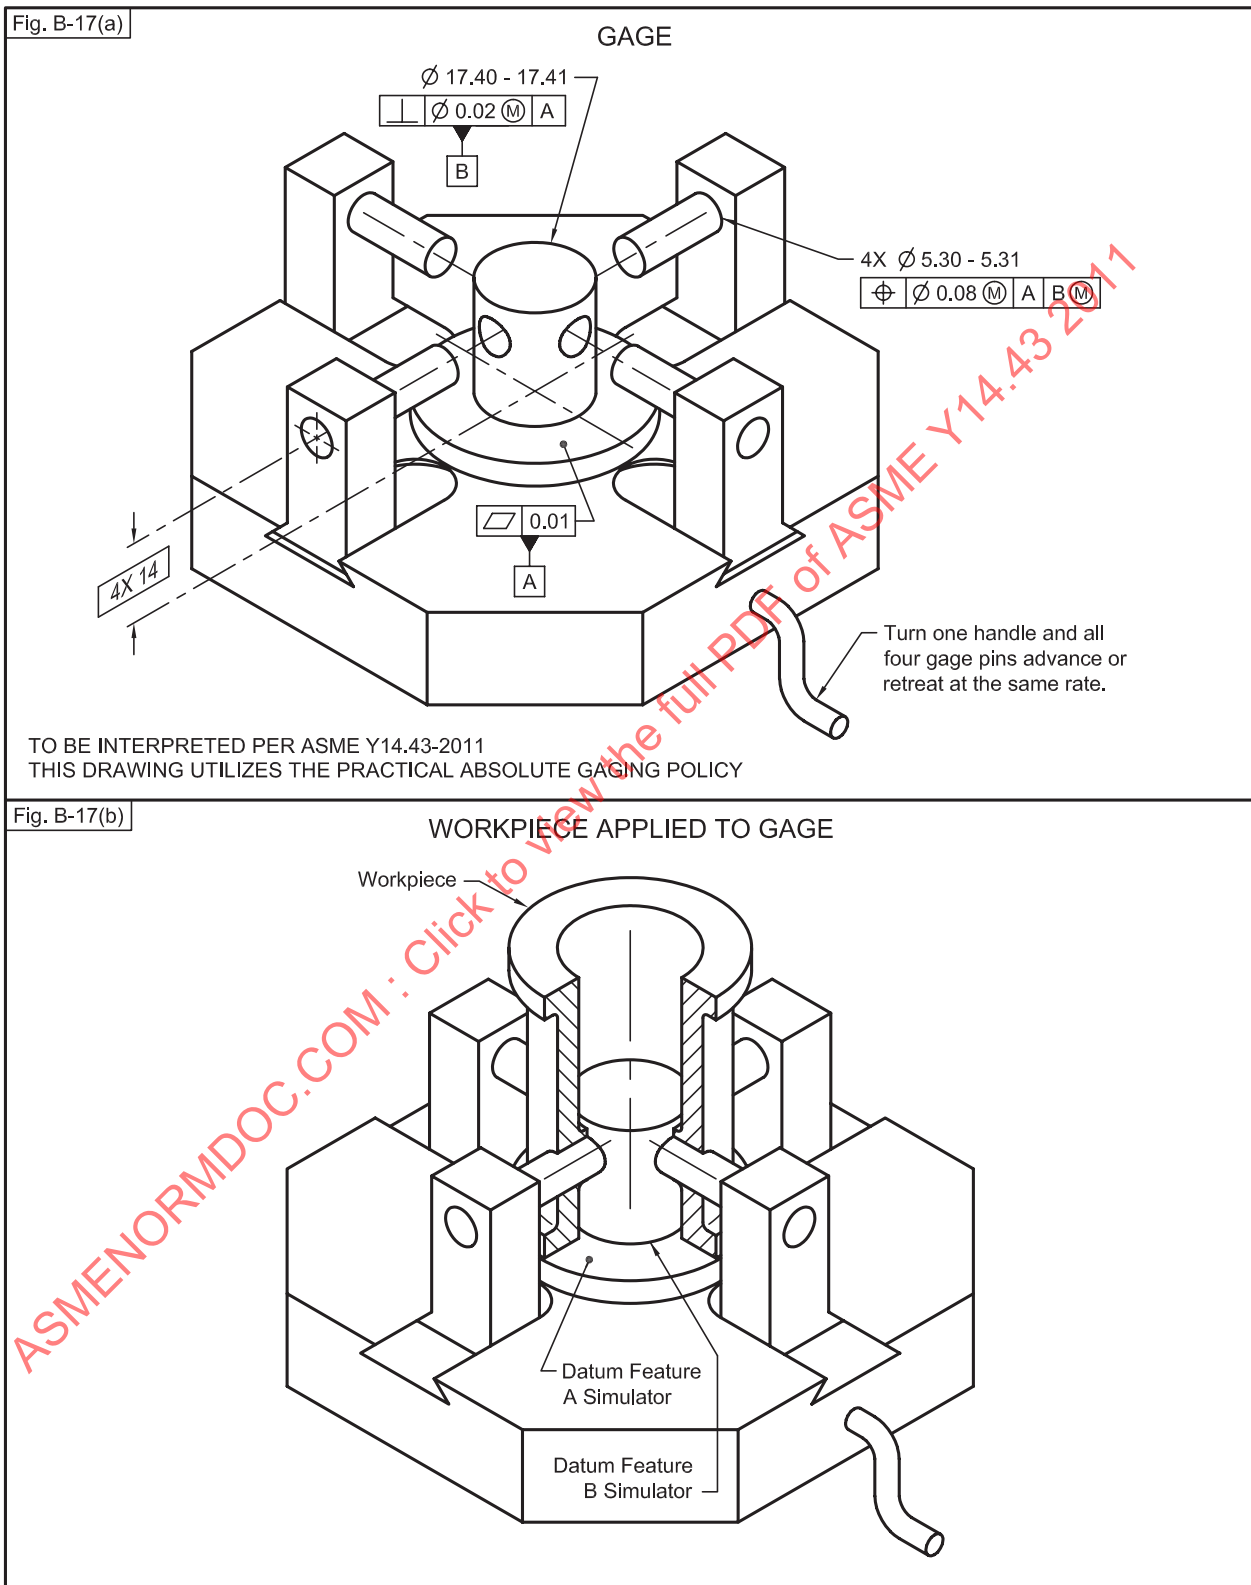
Radial Hole Pattern Located by Composite Position (Cont'd)
